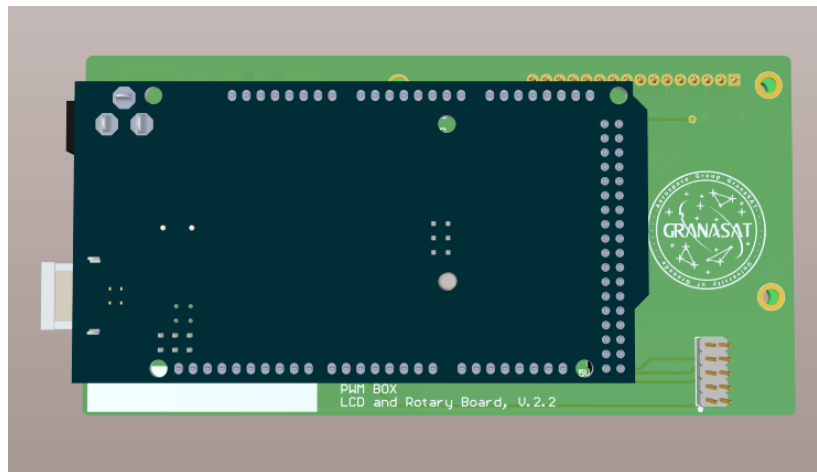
Printed Circuit Board (PCB) 1 bottom view
